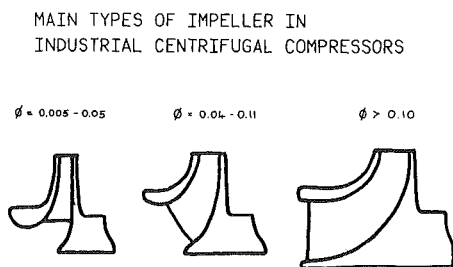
Sketch of main types of impeller in industrial centrifugal compressors
